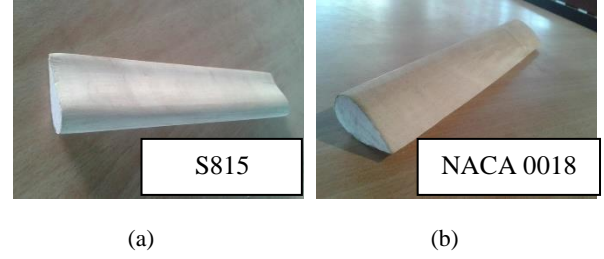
(a) Fabricated S815 rotor blade (b) fabricated NACA 0018 rotor blade
